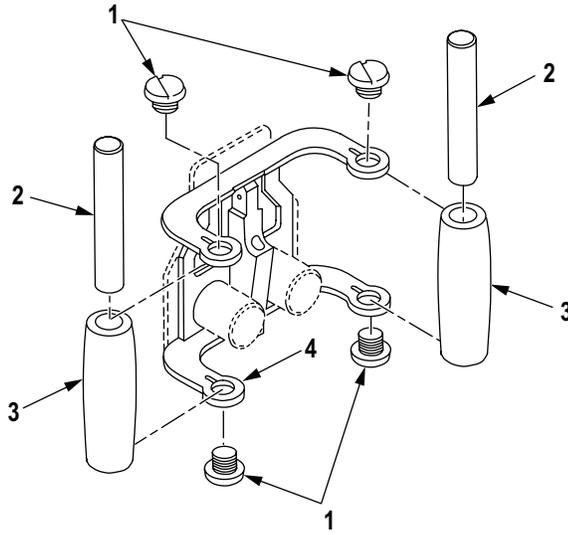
Bolt, Backplate, and Control Grip Assembly Disassembly.
